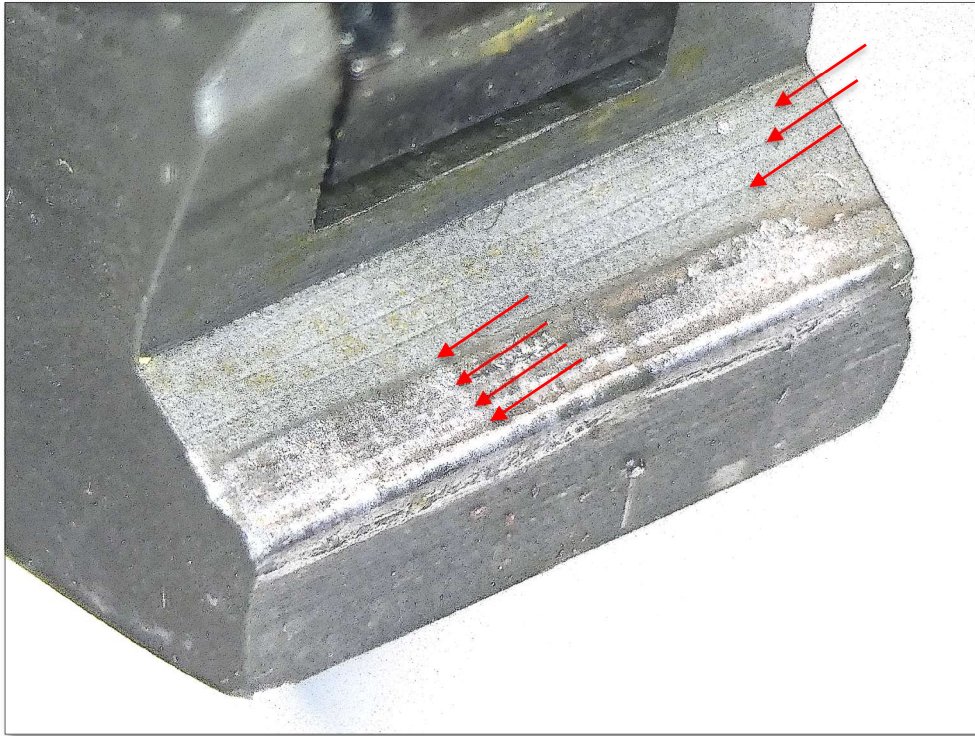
Subject Barrel Lug Wear and Machining Marks
